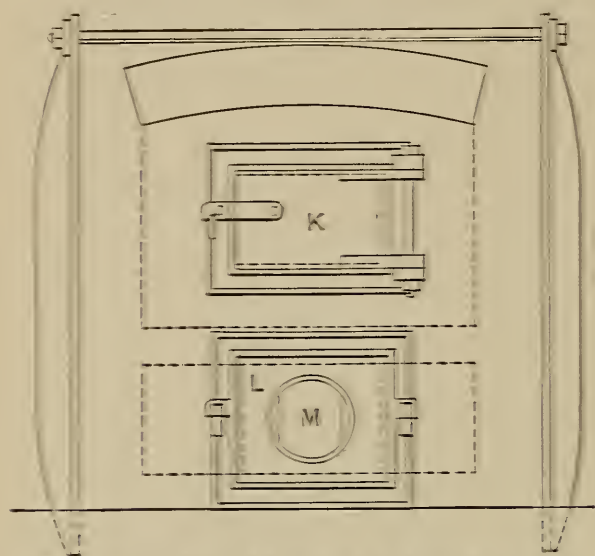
Rear Elevation of Annealing and Case-hardening Furnace.
